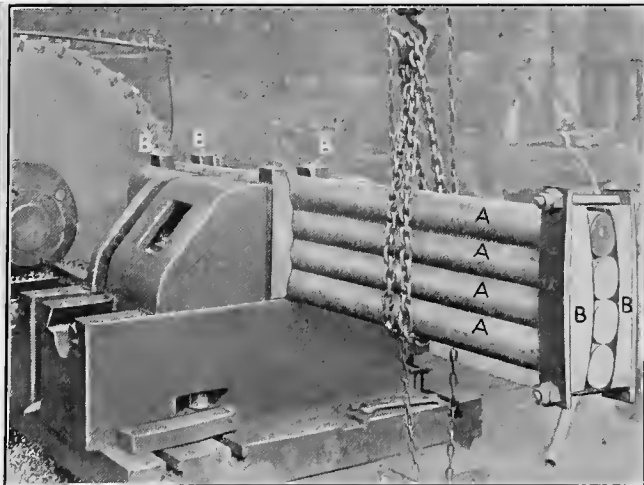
CUTTING BLANKS ON A NEWTON COLD-SAW
